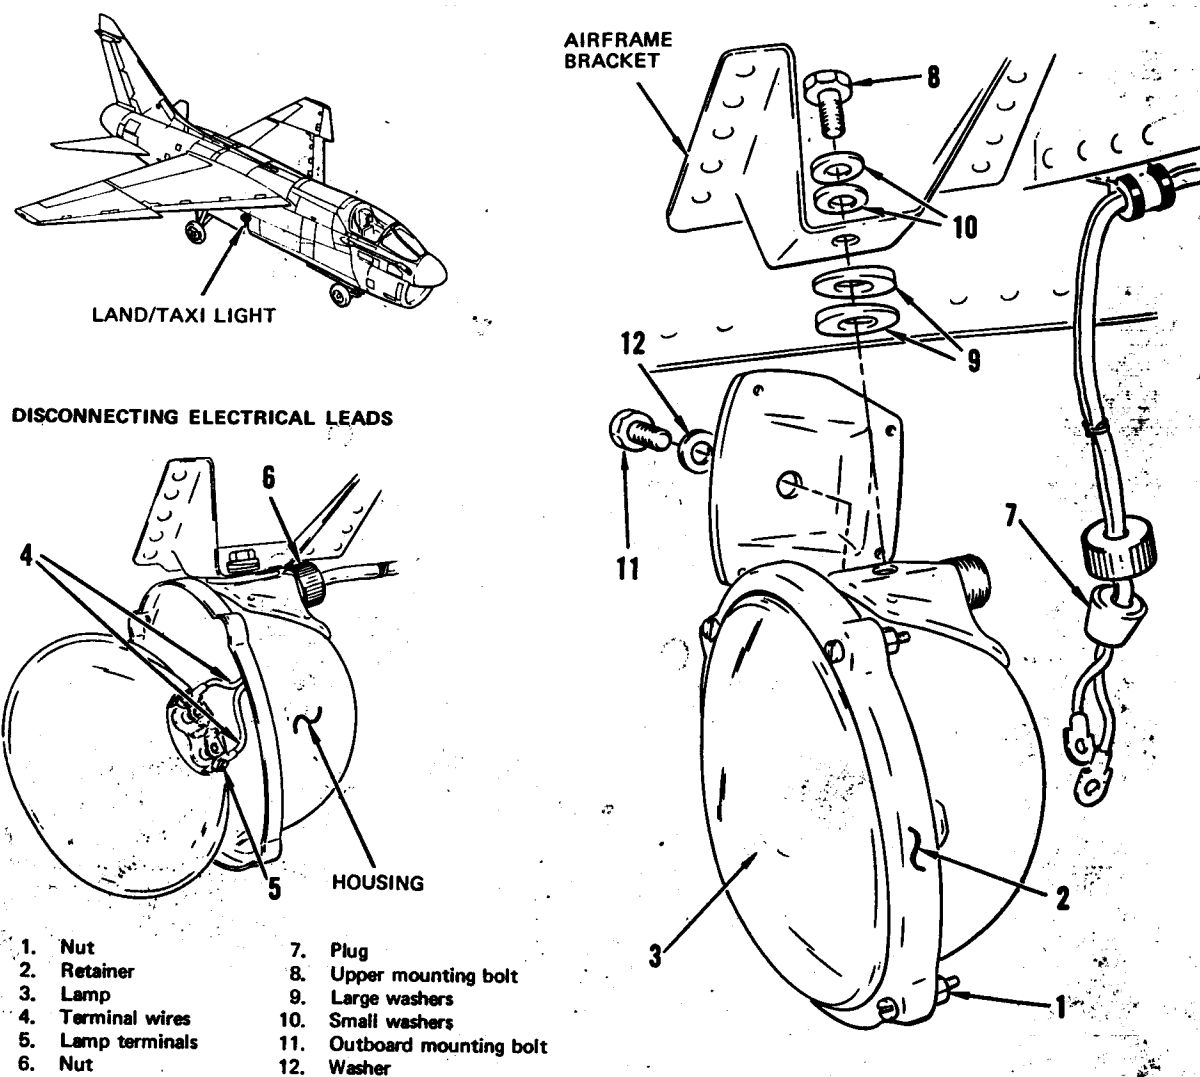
Land/Taxi Light Assembly Removal and Installation
